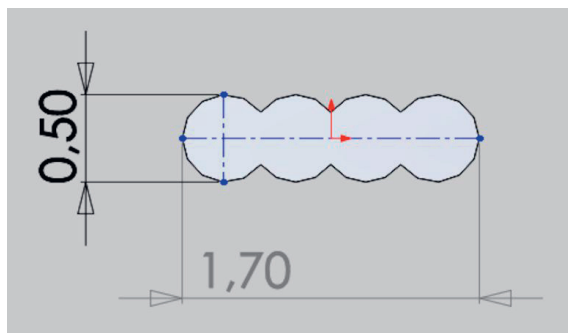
A SolidWorks schematic of the shape and dimensions of the extrusion die. The values are in millimeters.
